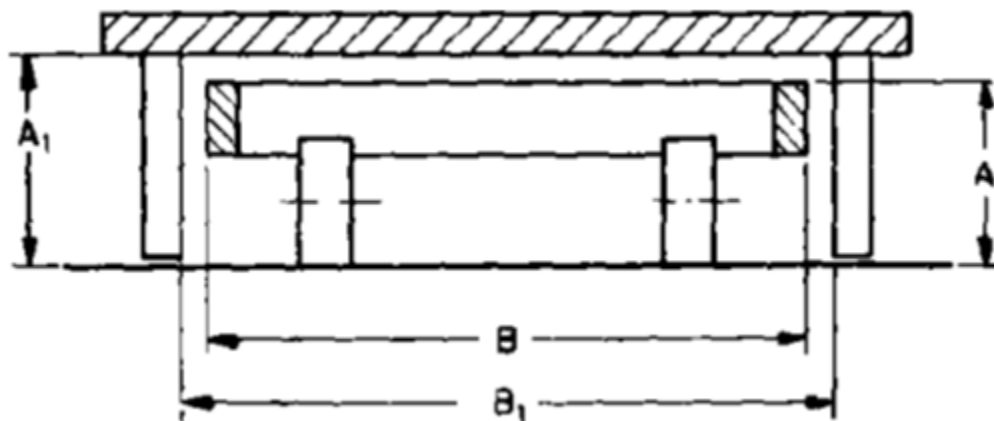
PRINCIPAL DIMENSIONS OF STILLAGE
